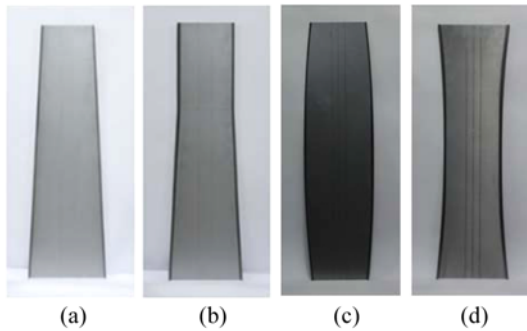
Fabricated flexible roll formed part: (a) Trapezoid shape; (b) Straight-trapezoid shape; (c) Convex shape; (d) Concave shape.
